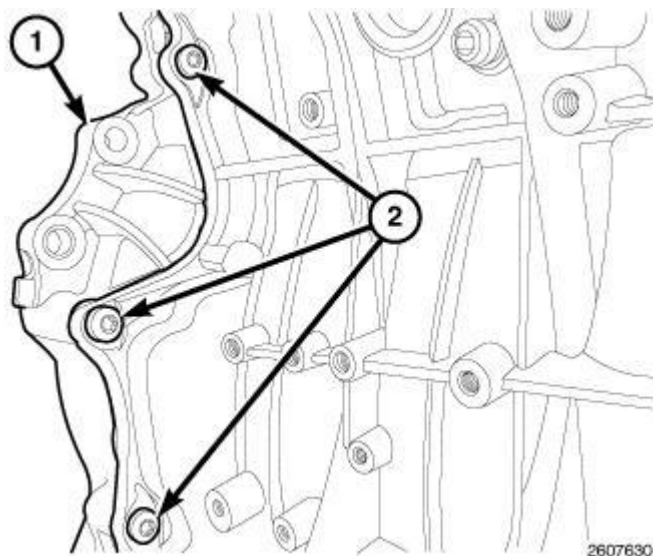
Timing Chain Upper Cover & Bolts
